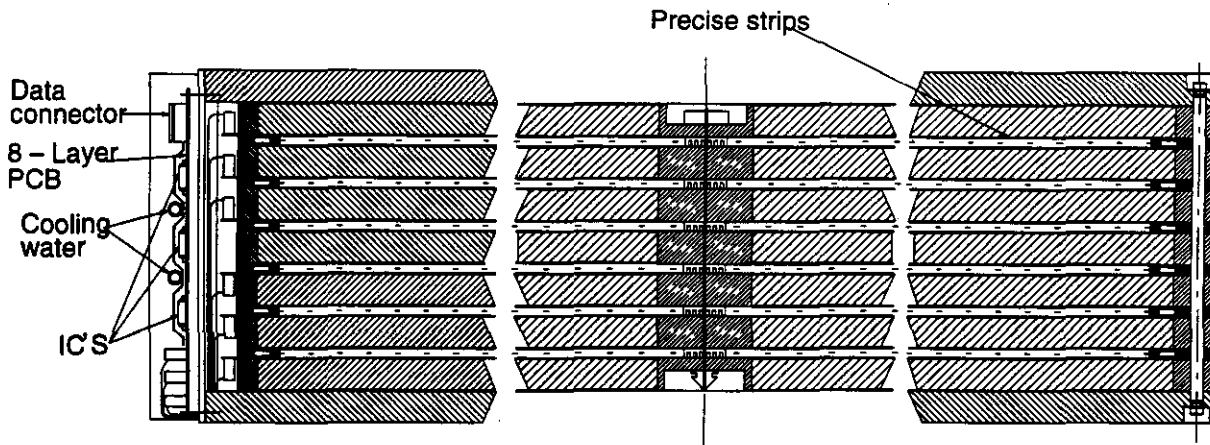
Cross-section view of CSC showing materials and general structure.
